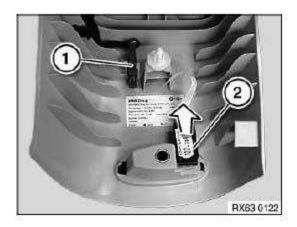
Identifying Plug Connection And Door Pillar Panel Courtesy of BMW OF NORTH AMERICA, INC.
